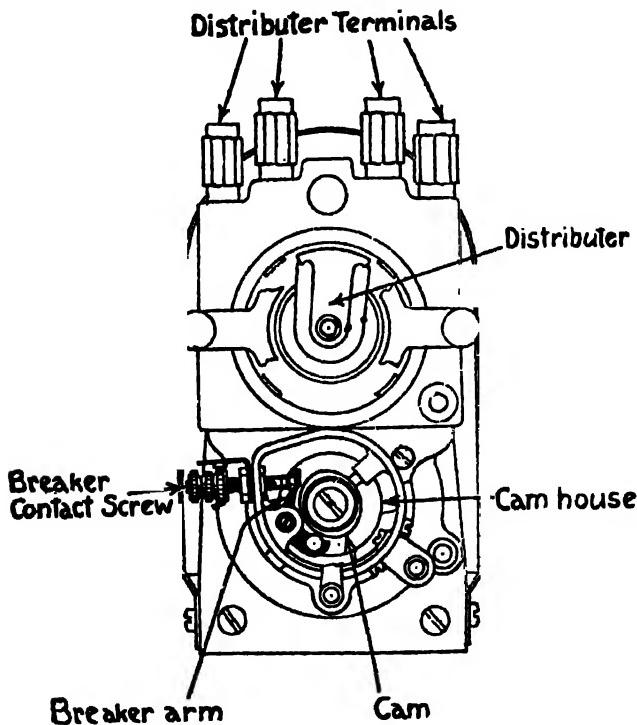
Front View of Remy Magneto, Showing Construction of Distributor and Contact Breaker.
